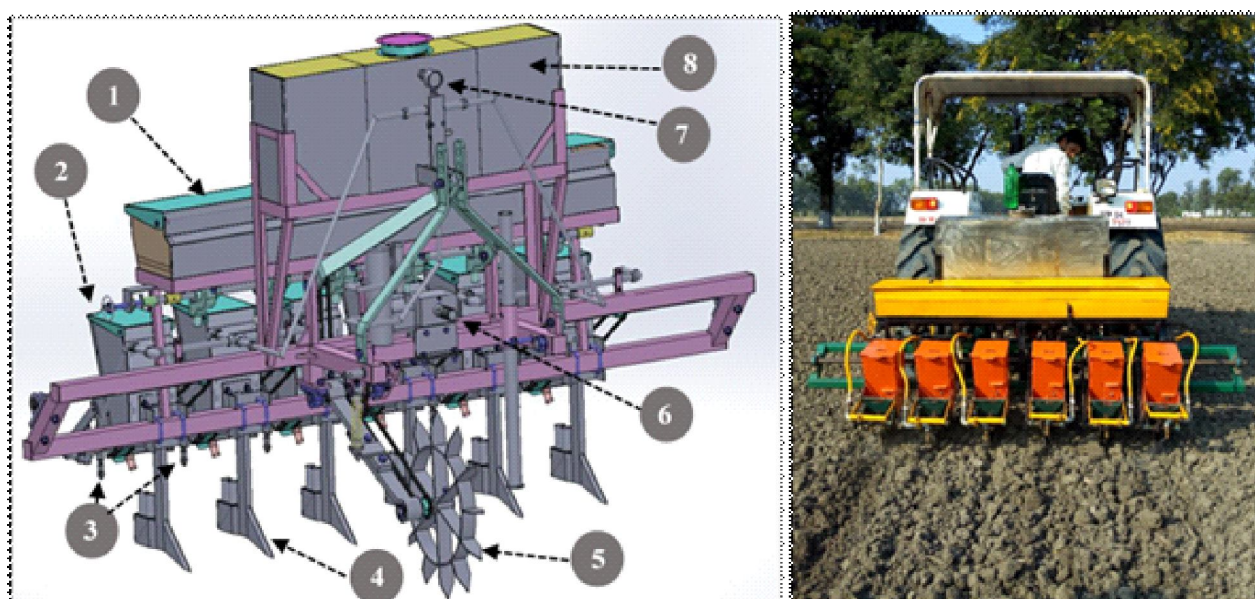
Developed herbicide applicator-cum-planter (1 – Fertilizer box; 2 – Seed box; 3 – Spray nozzle assembly; 4 – Furrow opener; 5 – Ground wheel; 6 – Single-action piston pump; 7 – Pressure gauge; 8 – Herbicide tank)
